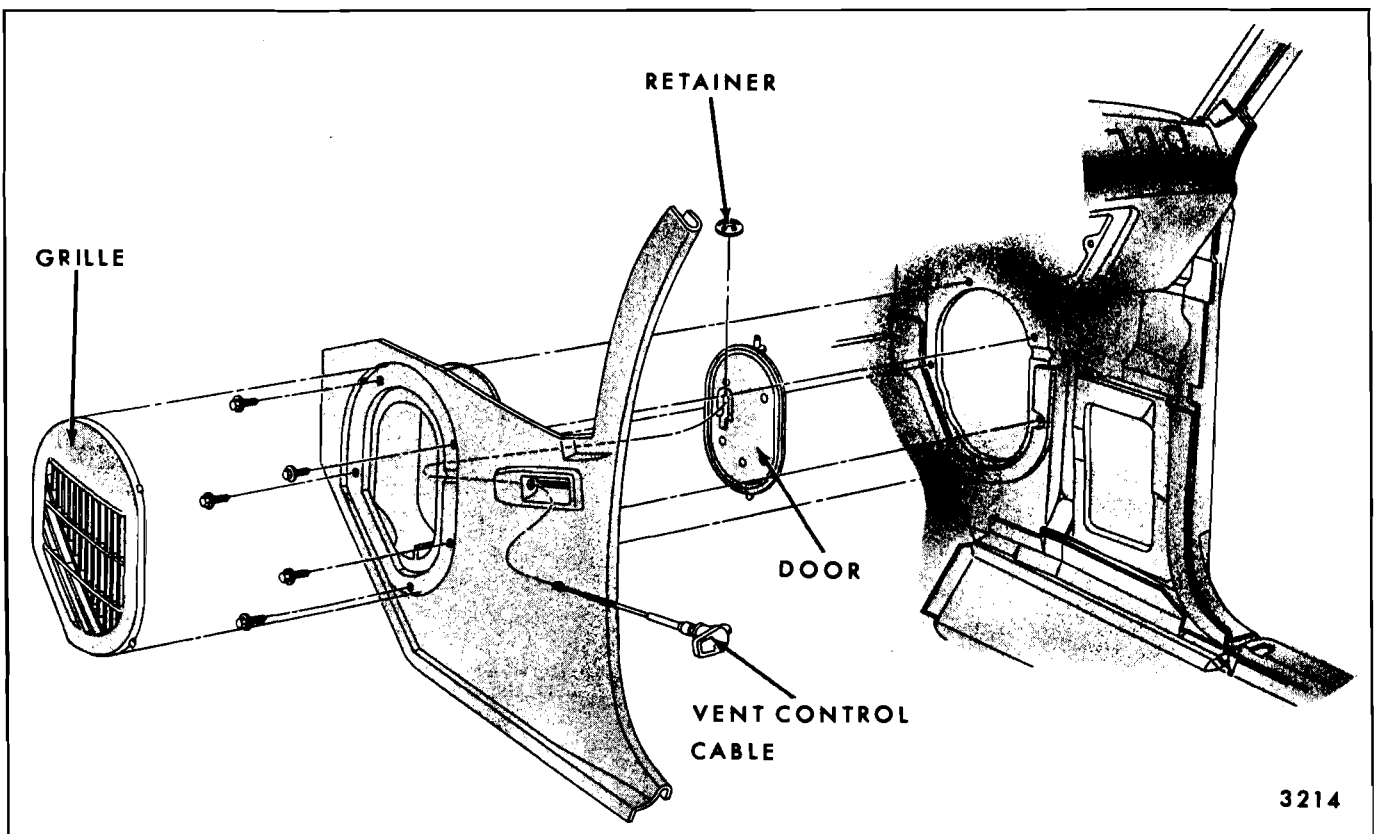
Shroud Side Finishing Panel - "X" Styles
